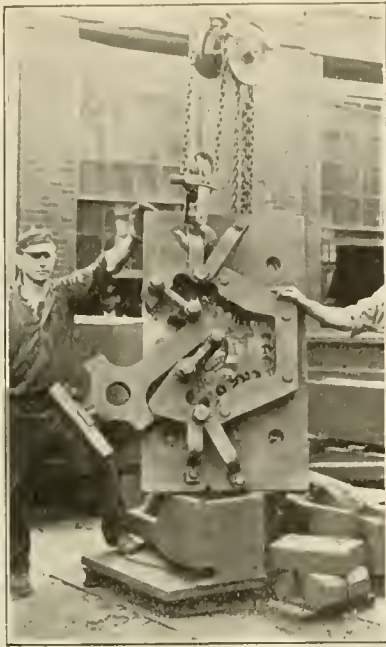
WING DIES FOR COMPLETING BRAKE HANGER GUIDES.
